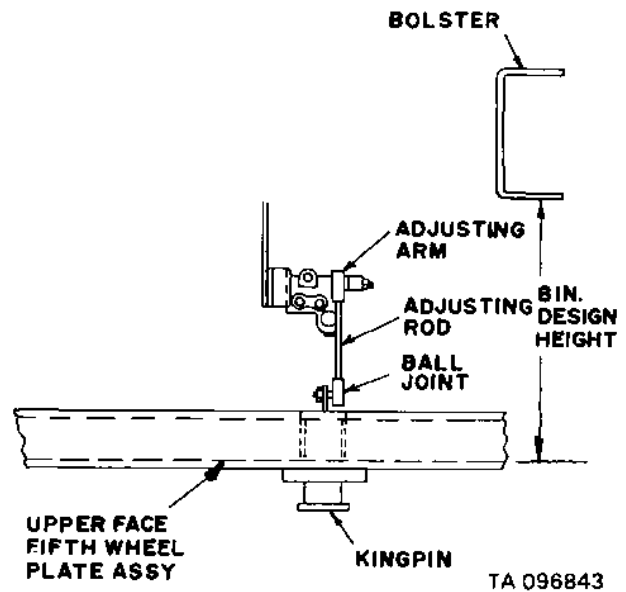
Ride height dimension adjustment, air mounted kingpin
